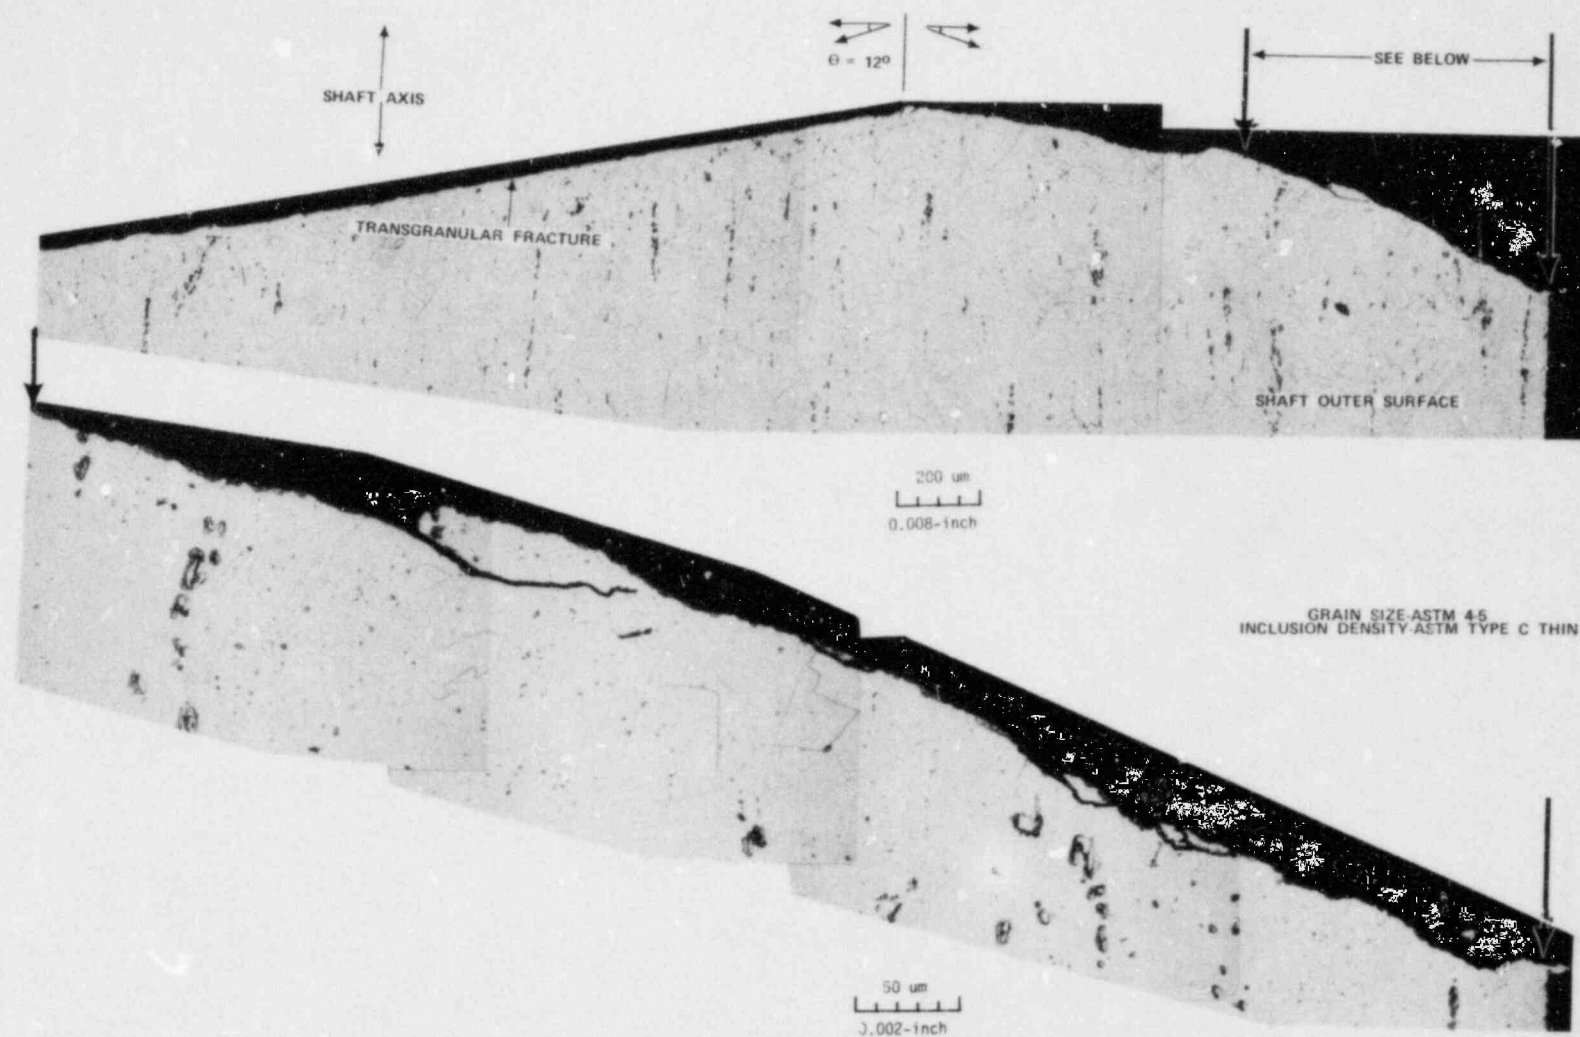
Longitudinal View of Specimen B1A1-1-5 at Crack Origin
